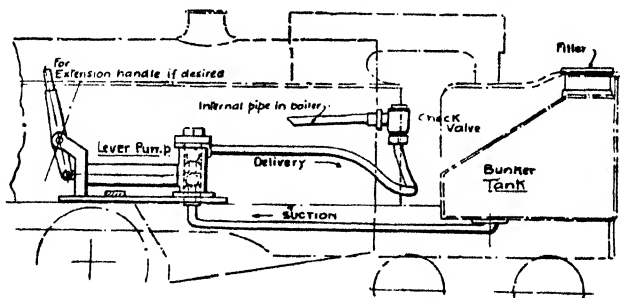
Fitting Lever Pump to Tank Locomotive.
